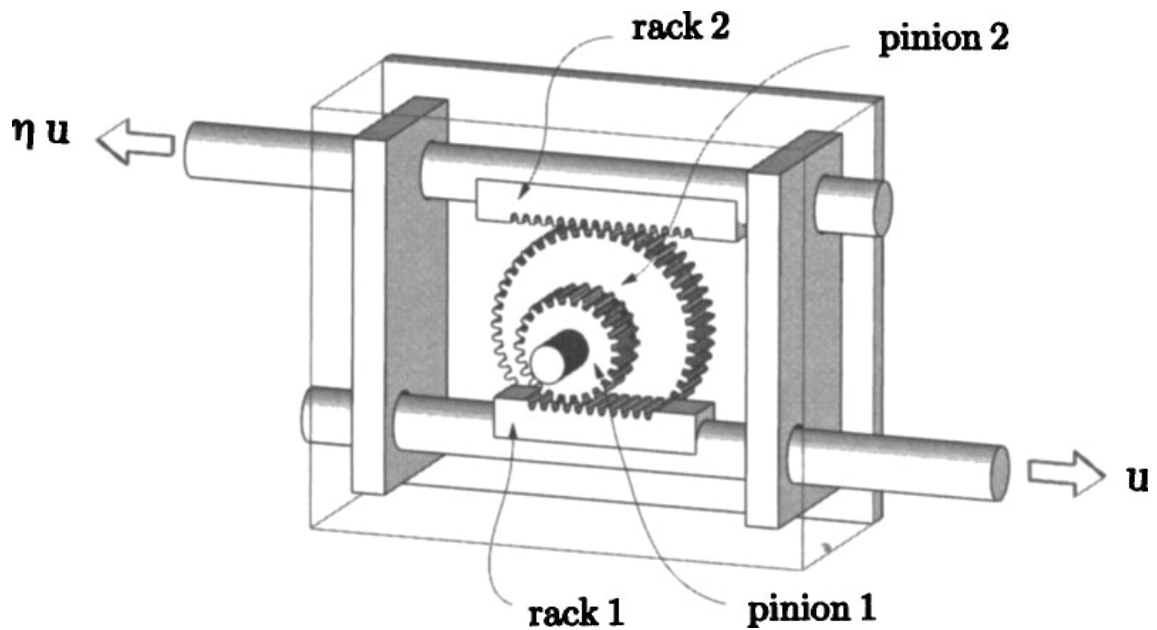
Geared Type Displacement Amplification Mechanism. Here,  $\eta$  is the ratio of pinion 2 radius to pinion 1 radius [27] .
